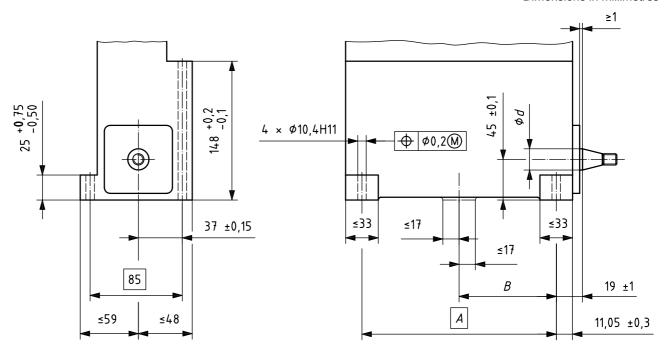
Base-mounted in-line fuel injection pump — Type 2
